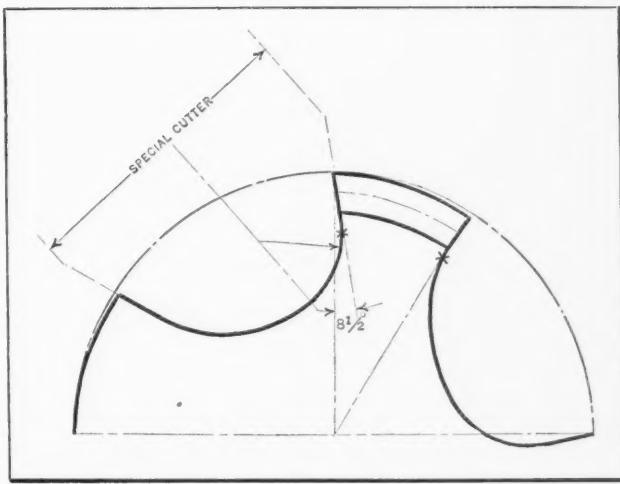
Tap with Four Flutes Milled with Special Cutter Producing 8 1/2-degree Constant, Positive Rake on the Cutting Edges
